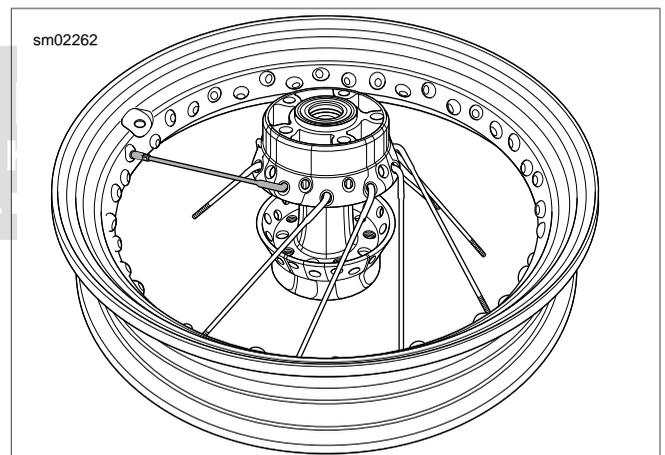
Brake Side Up: Start First Spoke of Bottom Row
